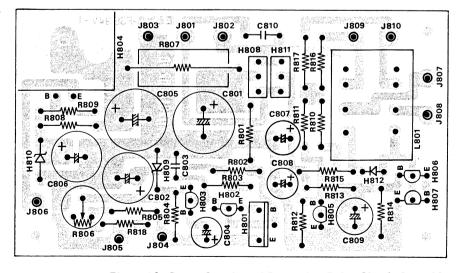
Power Supply and Protection Relay Circuit Assembly P800 Component Locations
